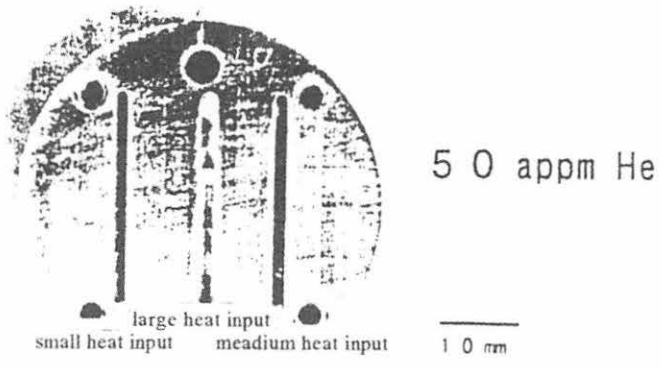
Surface appearance of 50 appm He specimen after welding.
